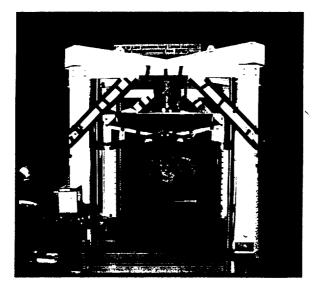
A close-up of the specialized tooling plate being<br/>used to bond the belly band. The arrows point to<br/>the plumb bob used to ensure angular position.
